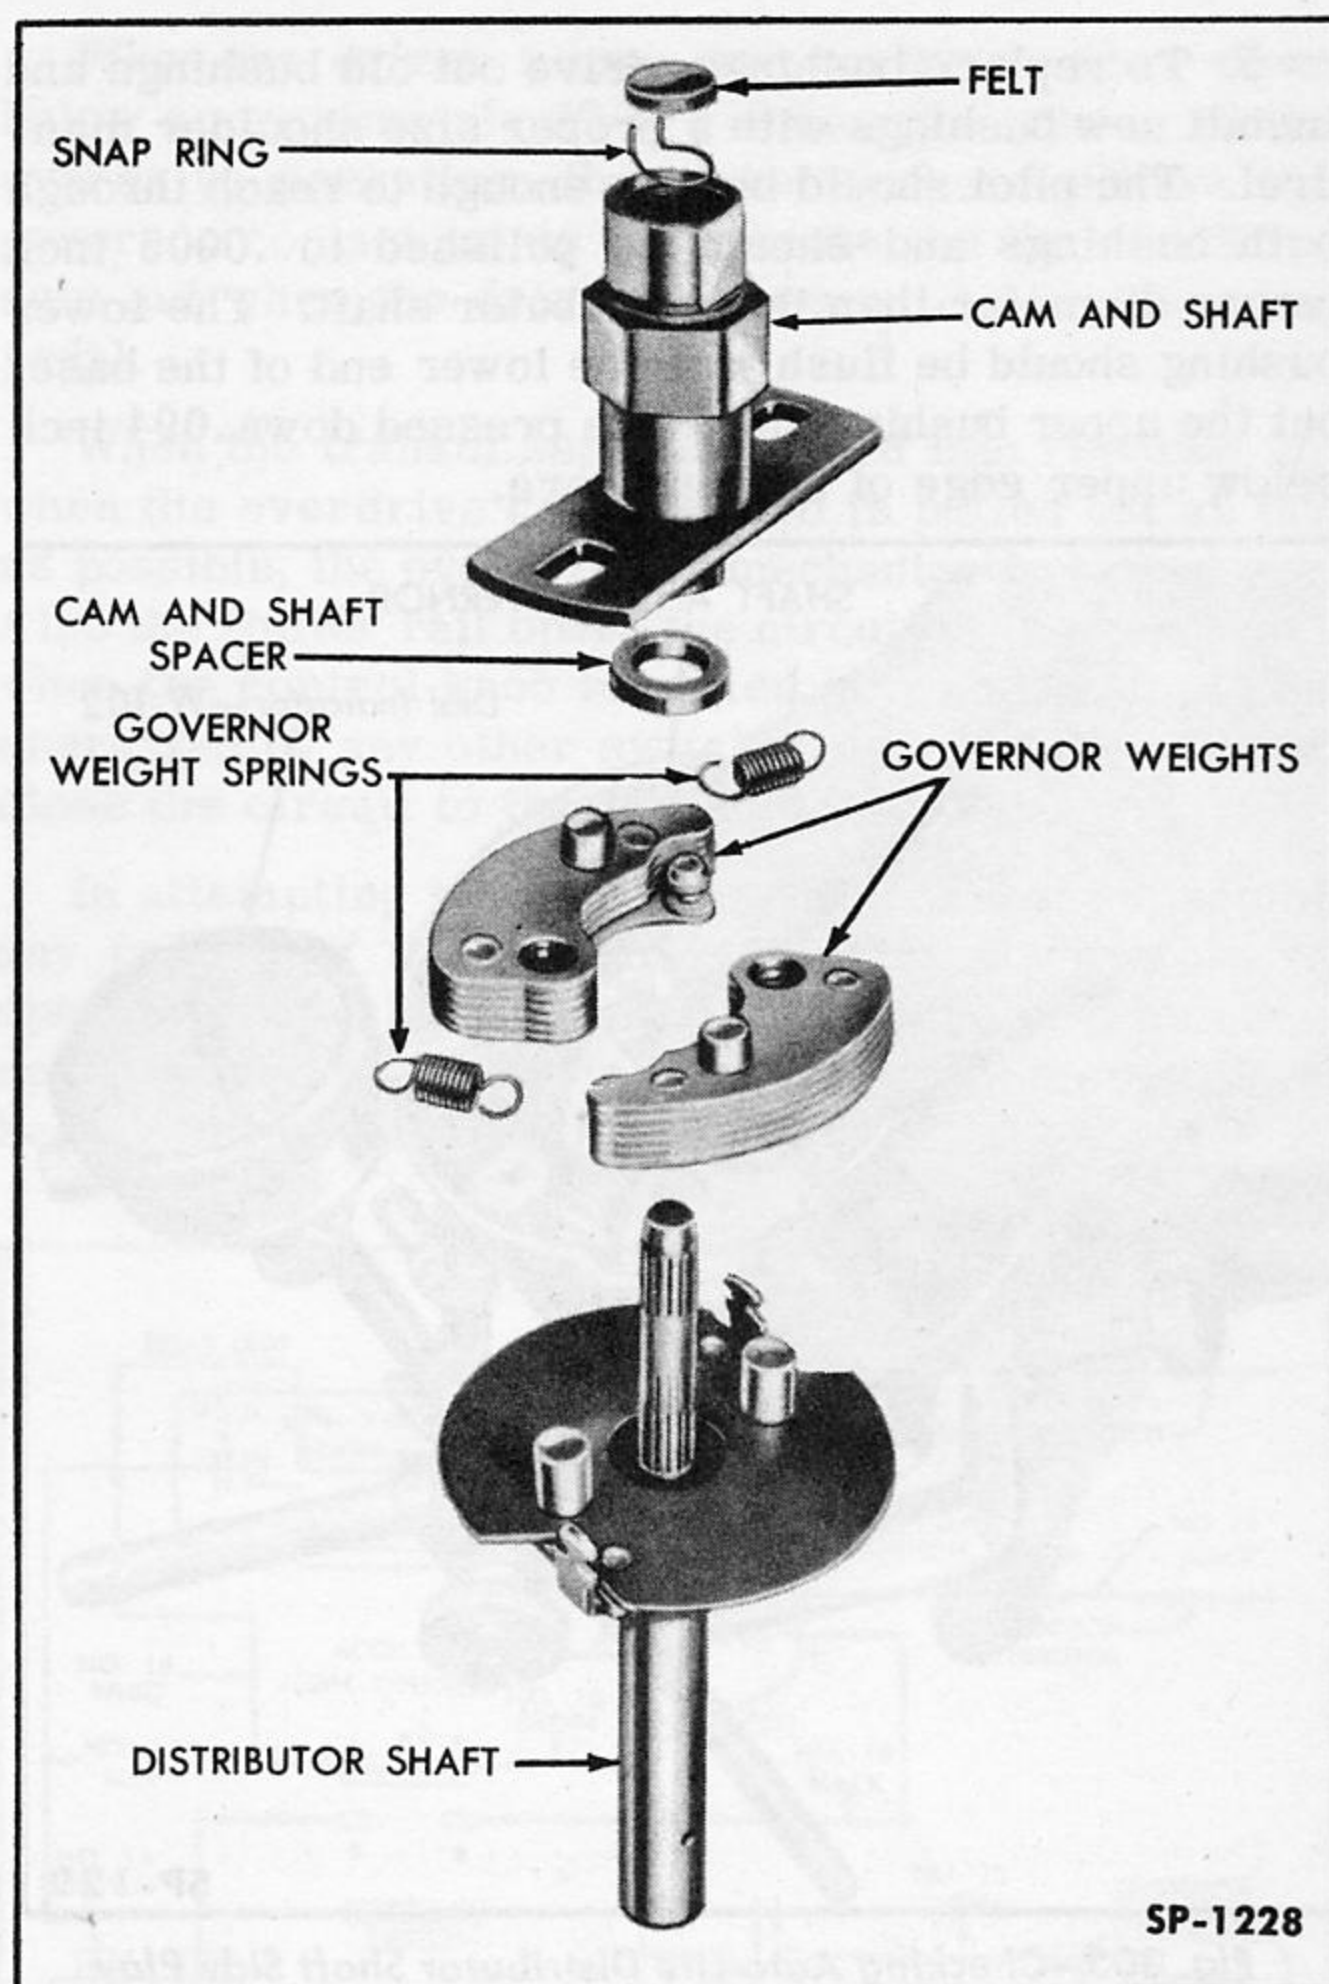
Auto-Lite Distributor Centrifugal Advance Parts—Exploded View
